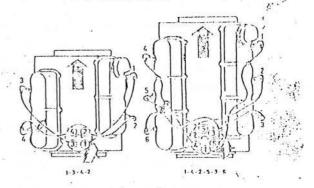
The valve clearance can be adjusted in accordance with the distributor rotor position. This ensures that the valve tappets rest on the heal of the respective cams. The numbers refer to the firing order for the two engine types.
